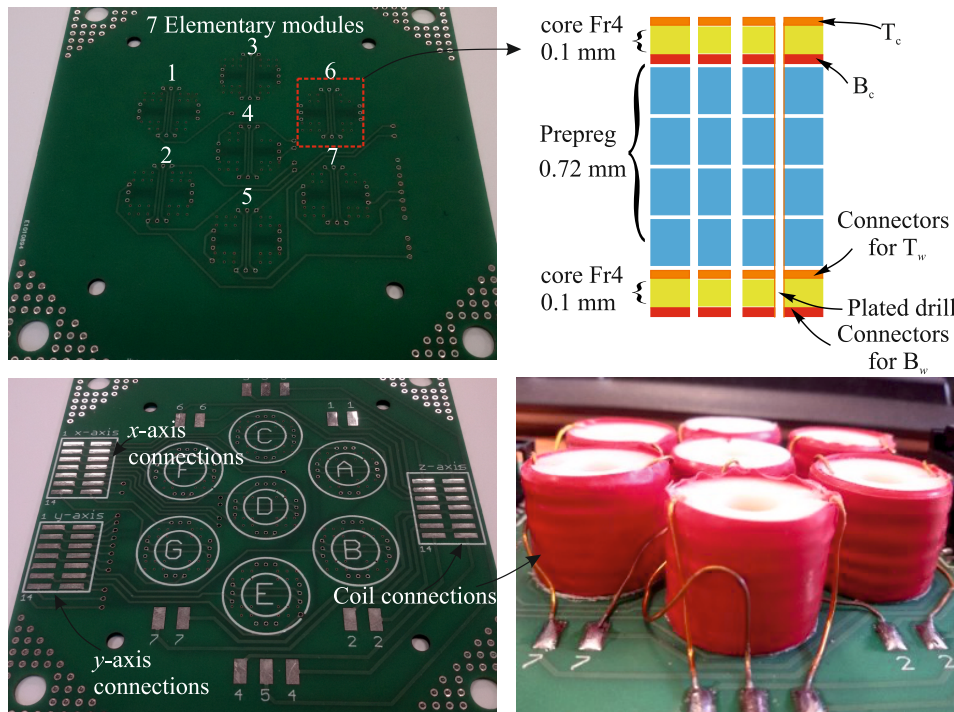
Top & Bottom view of the PCB, buildup design and representation of soldered air-core coil
